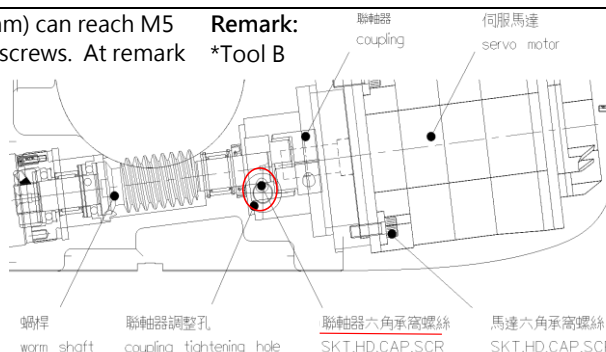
Rotate motor until tool B(4mm) can reach M5 screws on part ②. Loose the screws. At remark ② SKT.HD.CAP.SCR.
